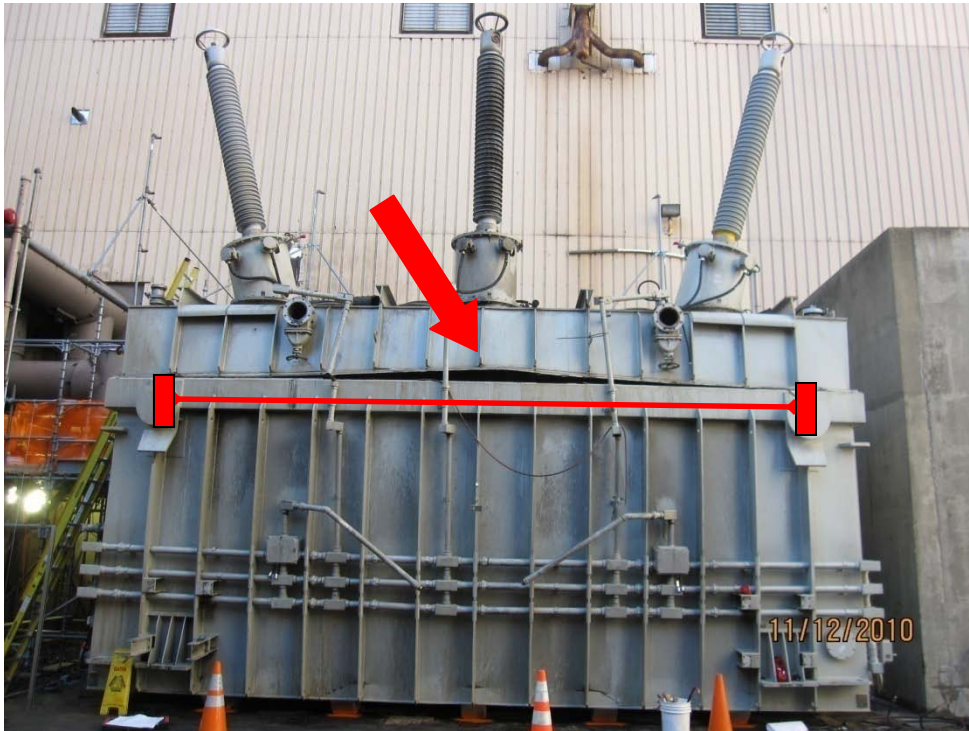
View of 21MT tank structure after removal of radiators. The red line is approximately the extent of the burst weld seam.
